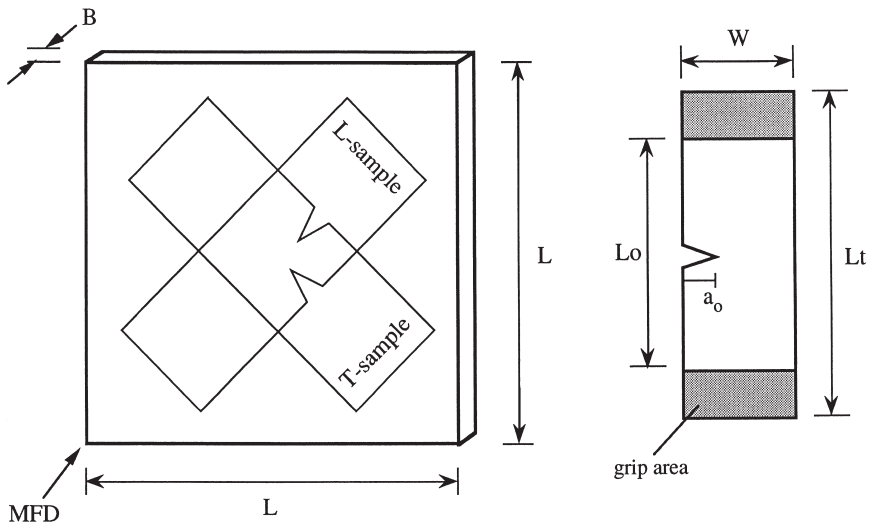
Geometry of the injection molded plaques, and positions of L and T-samples machined from them. MFD indicates the mold filling direction.
